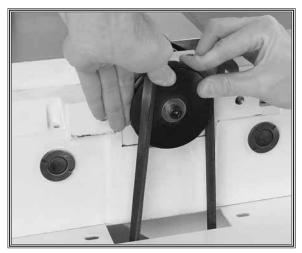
Rolling the V-belt onto the cutterhead pulley.
